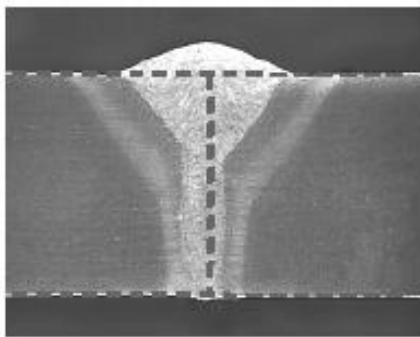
Hybrid welding of mild steel S355NL, 15 mm thickness (single-pass), edge preparation 6° single-V groove: CO<sub>2</sub> laser 15.5 kW, MIG impulse arc leading, filler wire G3Si1, diameter 1.2 mm, assist gas: argon-helium mixture, welding speed: 1.2 m/min.
